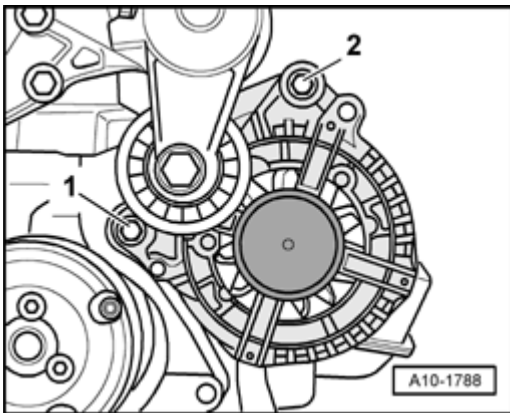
Removing Upper/Lower Securing Bolt For Generator
